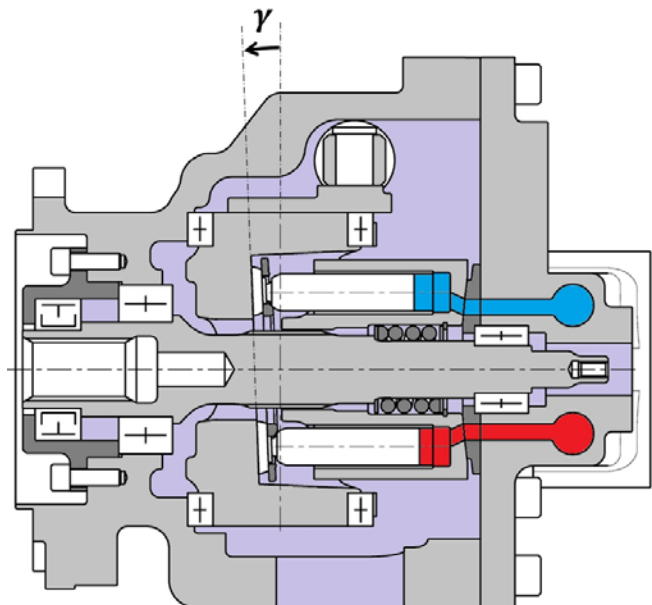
cross-angle γ machined in the bearing supported swash plate
